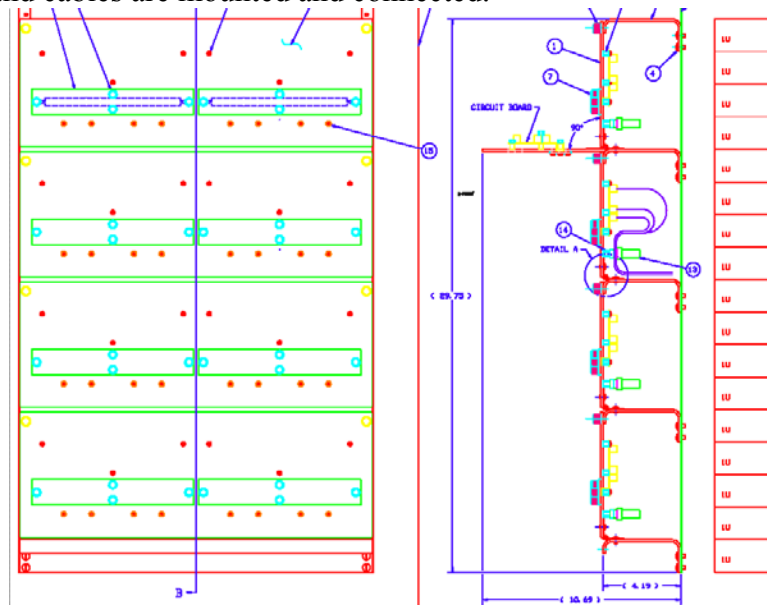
Final schematic of the (a) front and (b) side layout of the patch panel system for one Run IIb rack [7]. Each patch panel is 4U (7 inches) in height.
